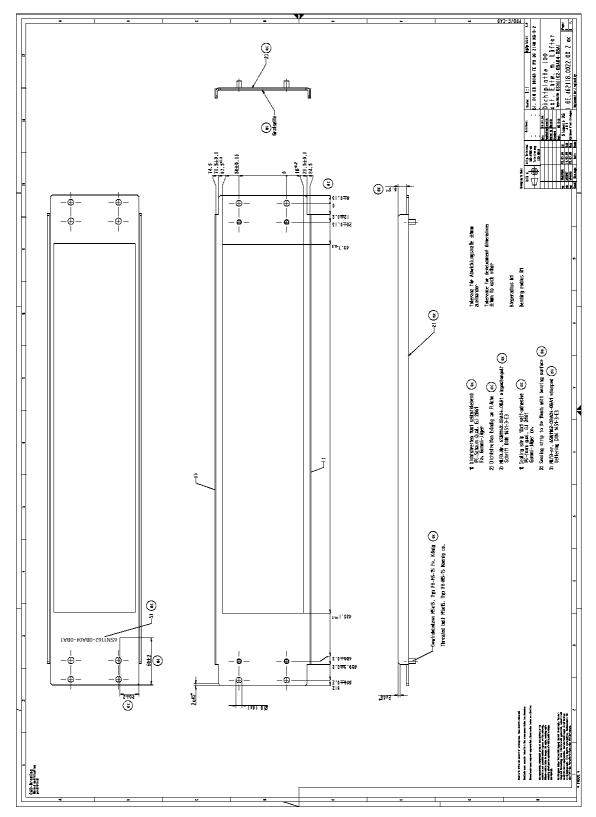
External cooling, mounting frame for cabinet installation module width 100 mm, 6SN1162-0BA04-0BA1
